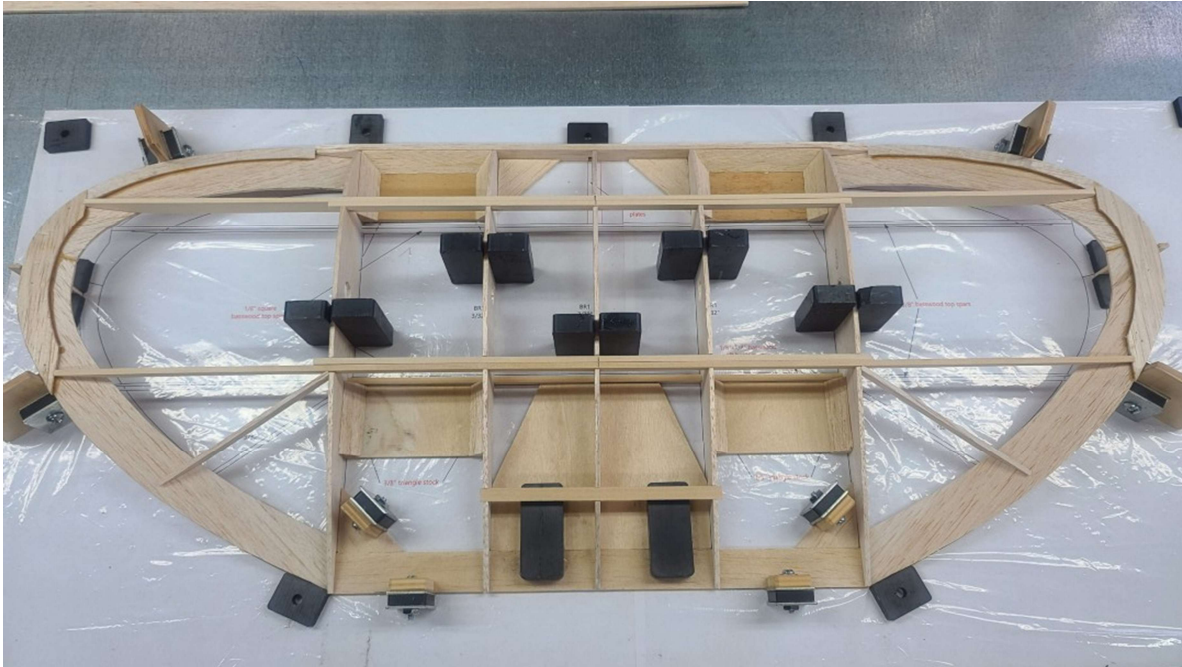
Modified Bottom Wing Full-Up Dry Fit Check on Magnetic Build Board
